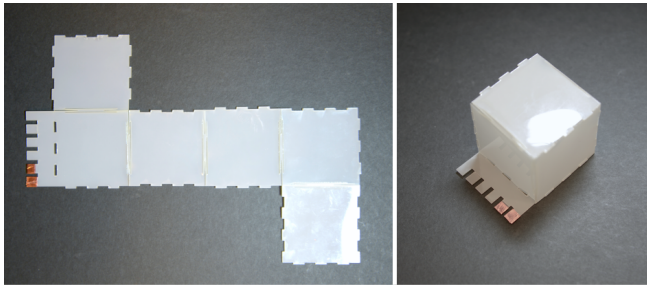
Left: laser cut folding pattern; right: the resulting object.
